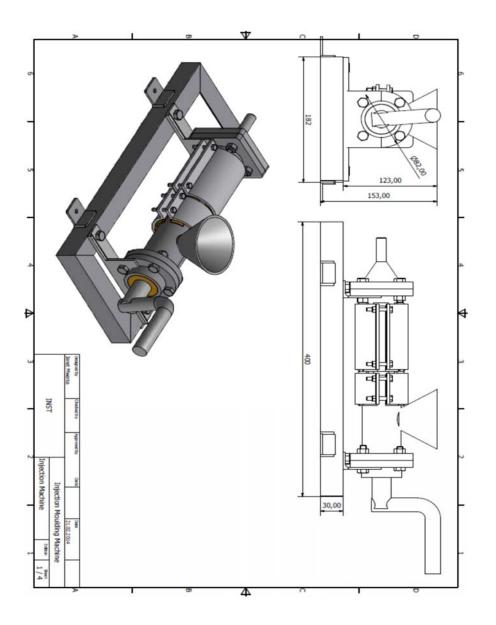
The Injection Moulding Machine Front and End Elevations with Dimensions (mm) and 3D images.
